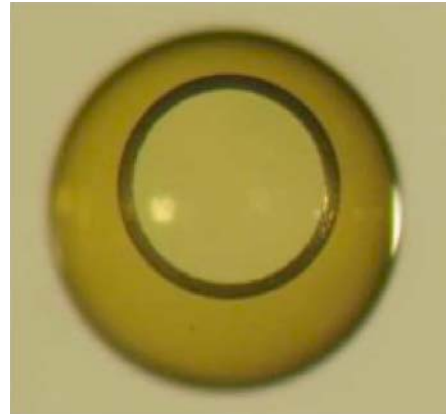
A hollow GDP shell with a machined hole to be placed on top of a fast ignition target.
